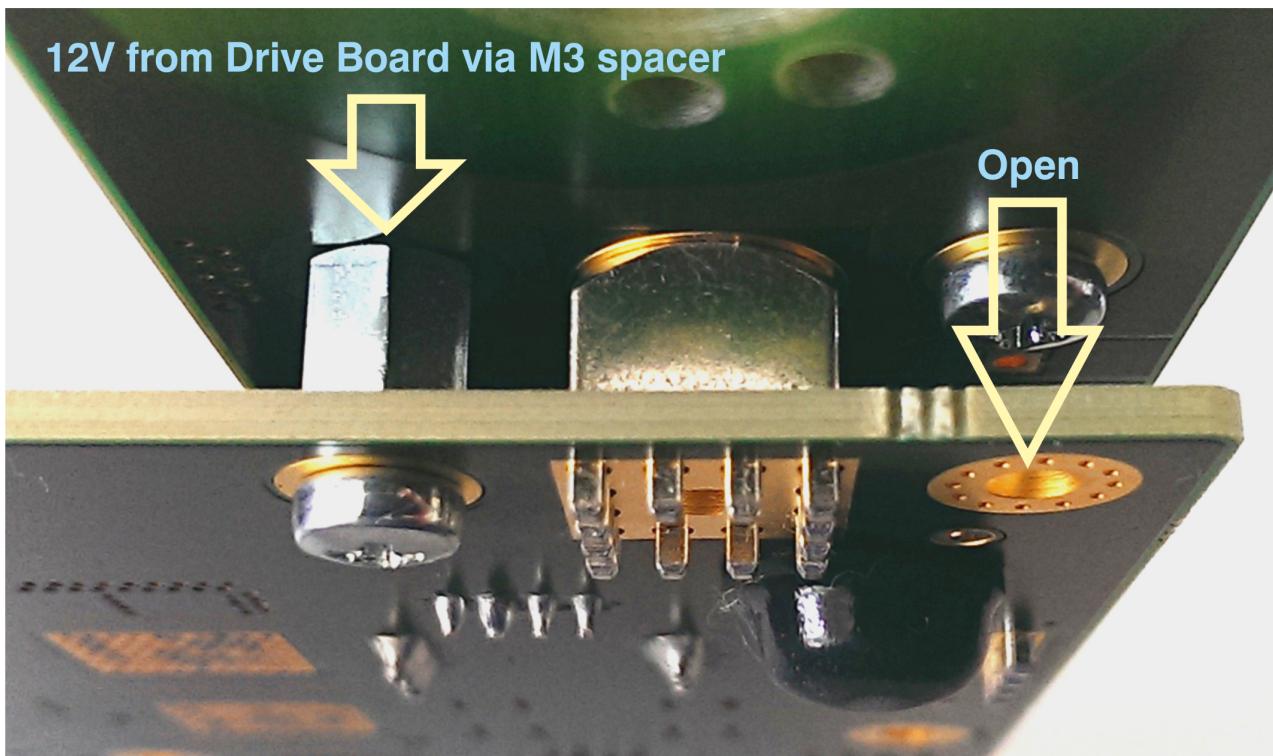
M3 spacer and two M3 screws connect 12V from Drive board to Adapter board.
